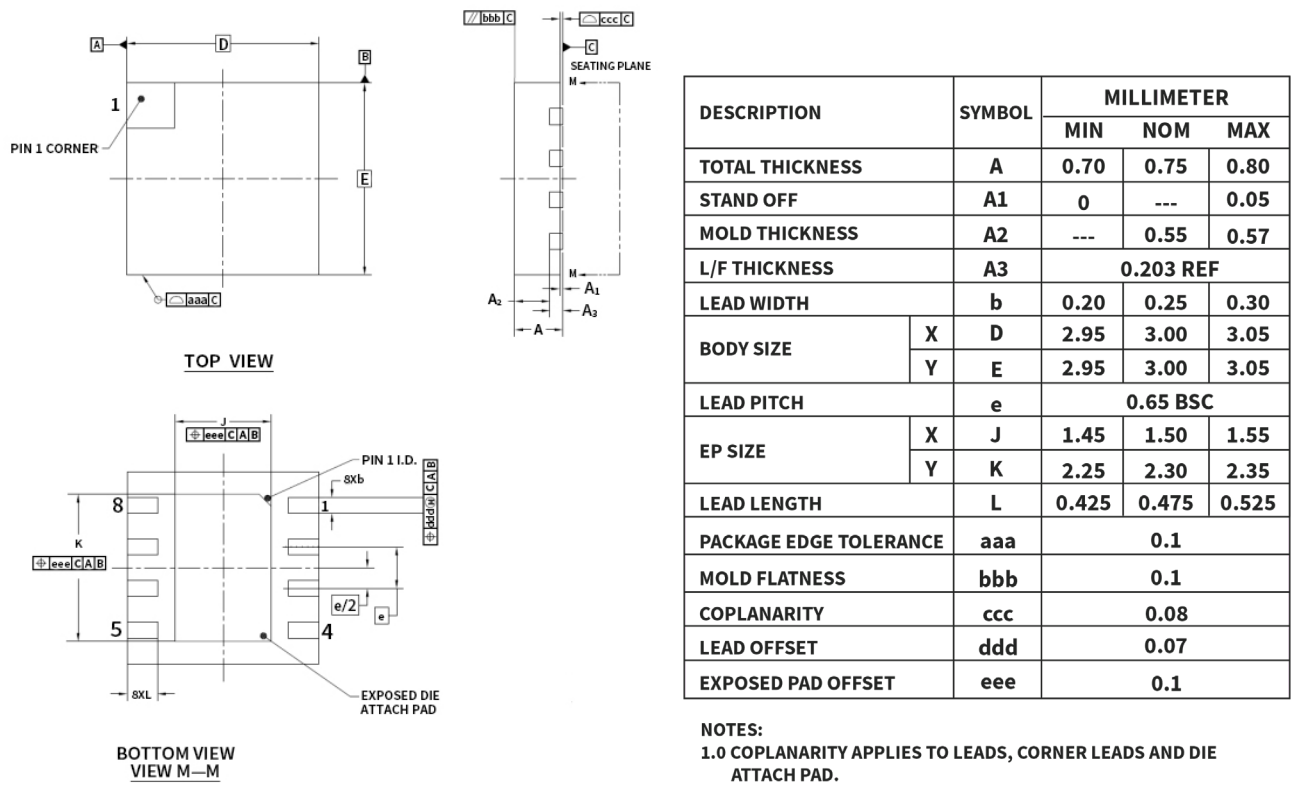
DFN3X3-8L Package Shape and Dimension
